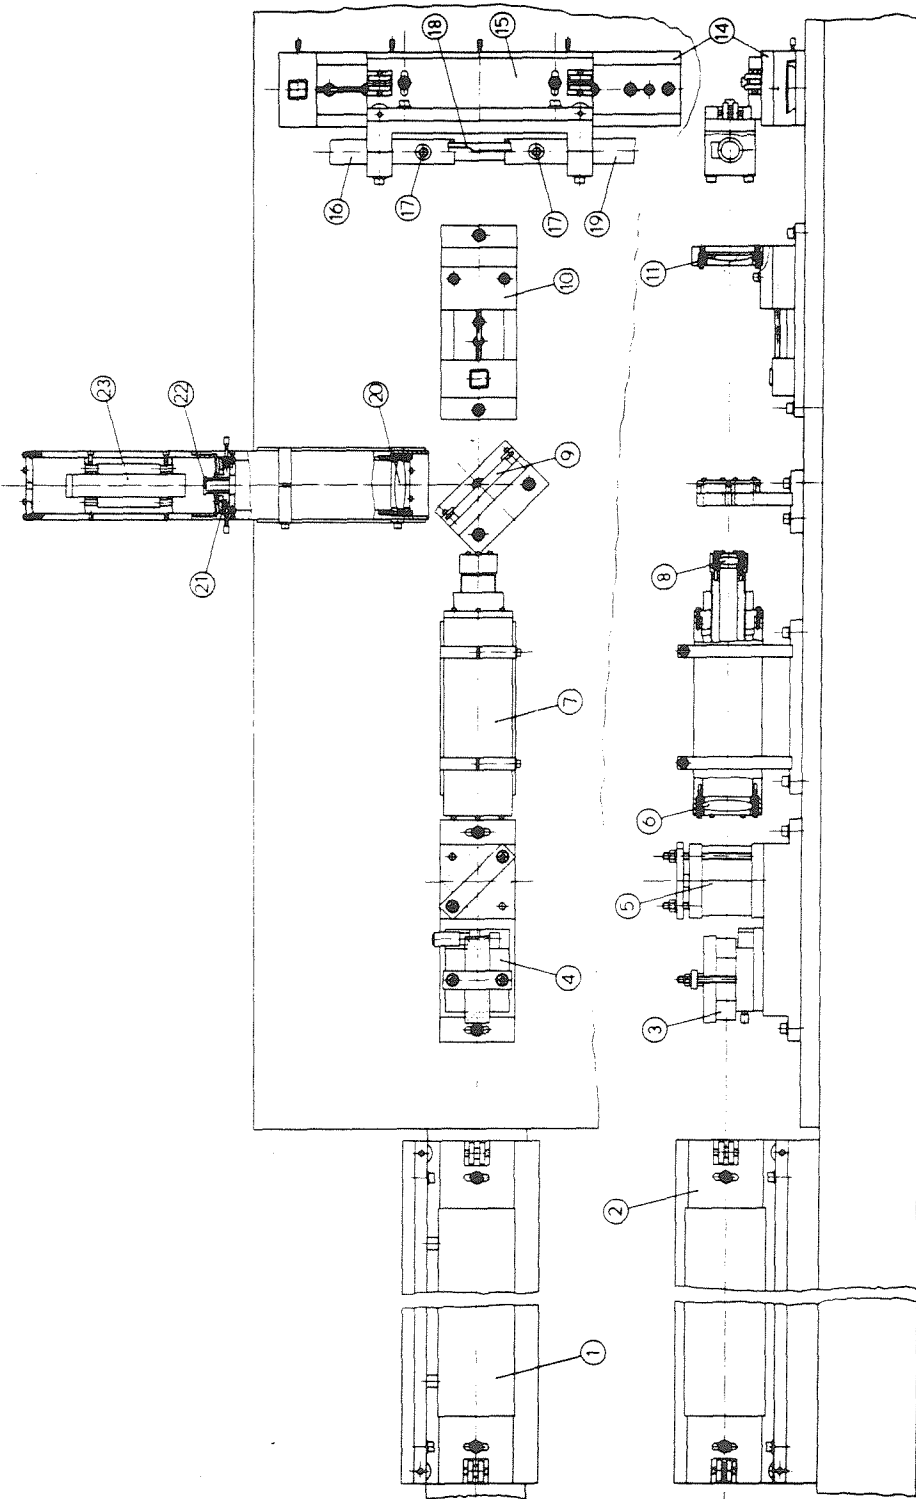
Machine drawing of the CSM optical lay-out, top and side views: laser (1) on its mount (2), beam displacer (3) on its micrometric side translation stage (4), beamsplitter cube (5), lenses (6 and 8) of the telescopic relay (7), front surface mirror (9), longitudinal translation stage (10) of the focusing and receiving lens (13), transverse translation stage (14) of the venturi tube mount (15), inlet (16) and outlet (19) lines of the venturi tube (18), pressure tap (17), photomultiplier collimating lens (20), mount (21) of the field stop aperture (22), photomultiplier (23).
